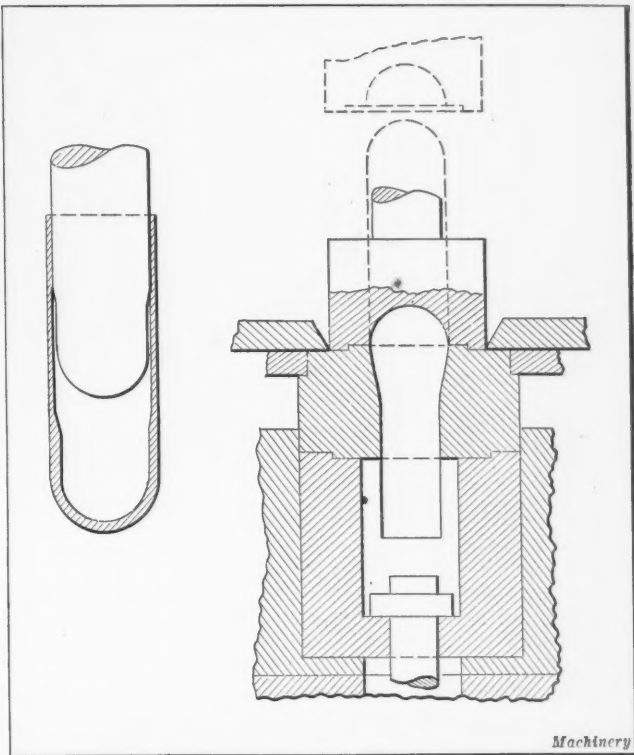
Diagram illustrating how the Shell is thinned, and Cross-section of Dies used in Necking or Reverse Drawing
